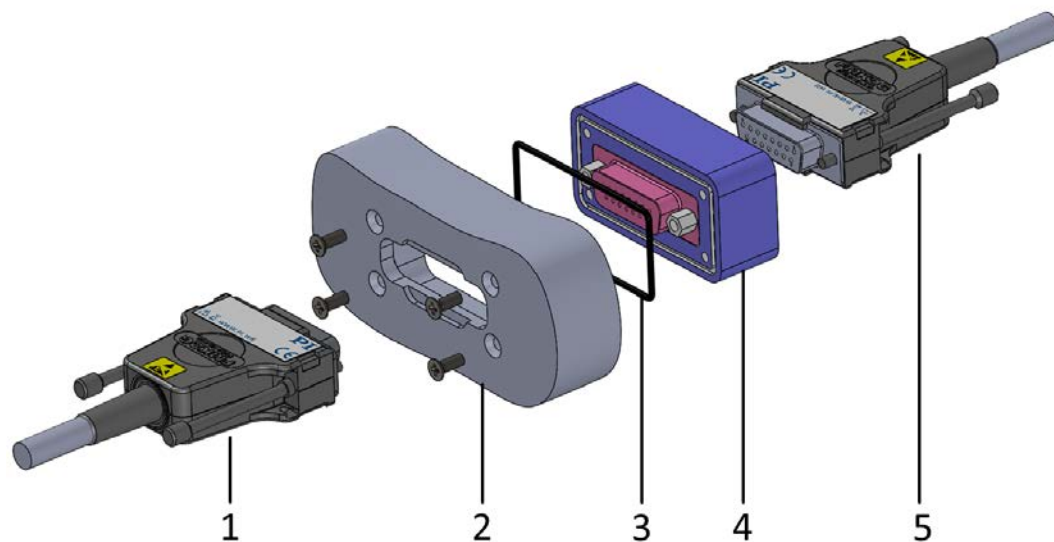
Example for installing the C-815.VF vacuum feedthrough. Links: Vacuum side, right: Air side
